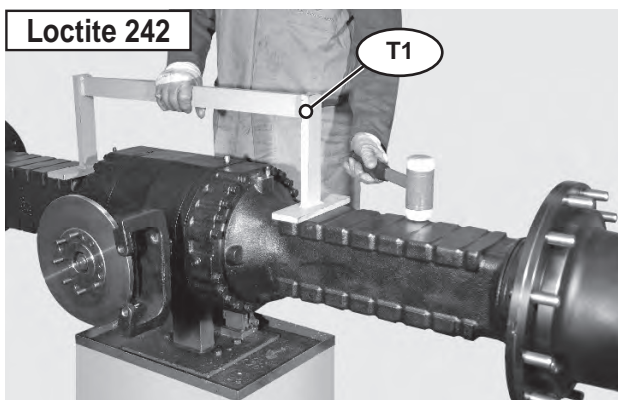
Check the flatness of the arms, using tool T1 (See drawing T1 p. 34); then lock the arms into their final position, using screws adequately coated with Loctite 242.
